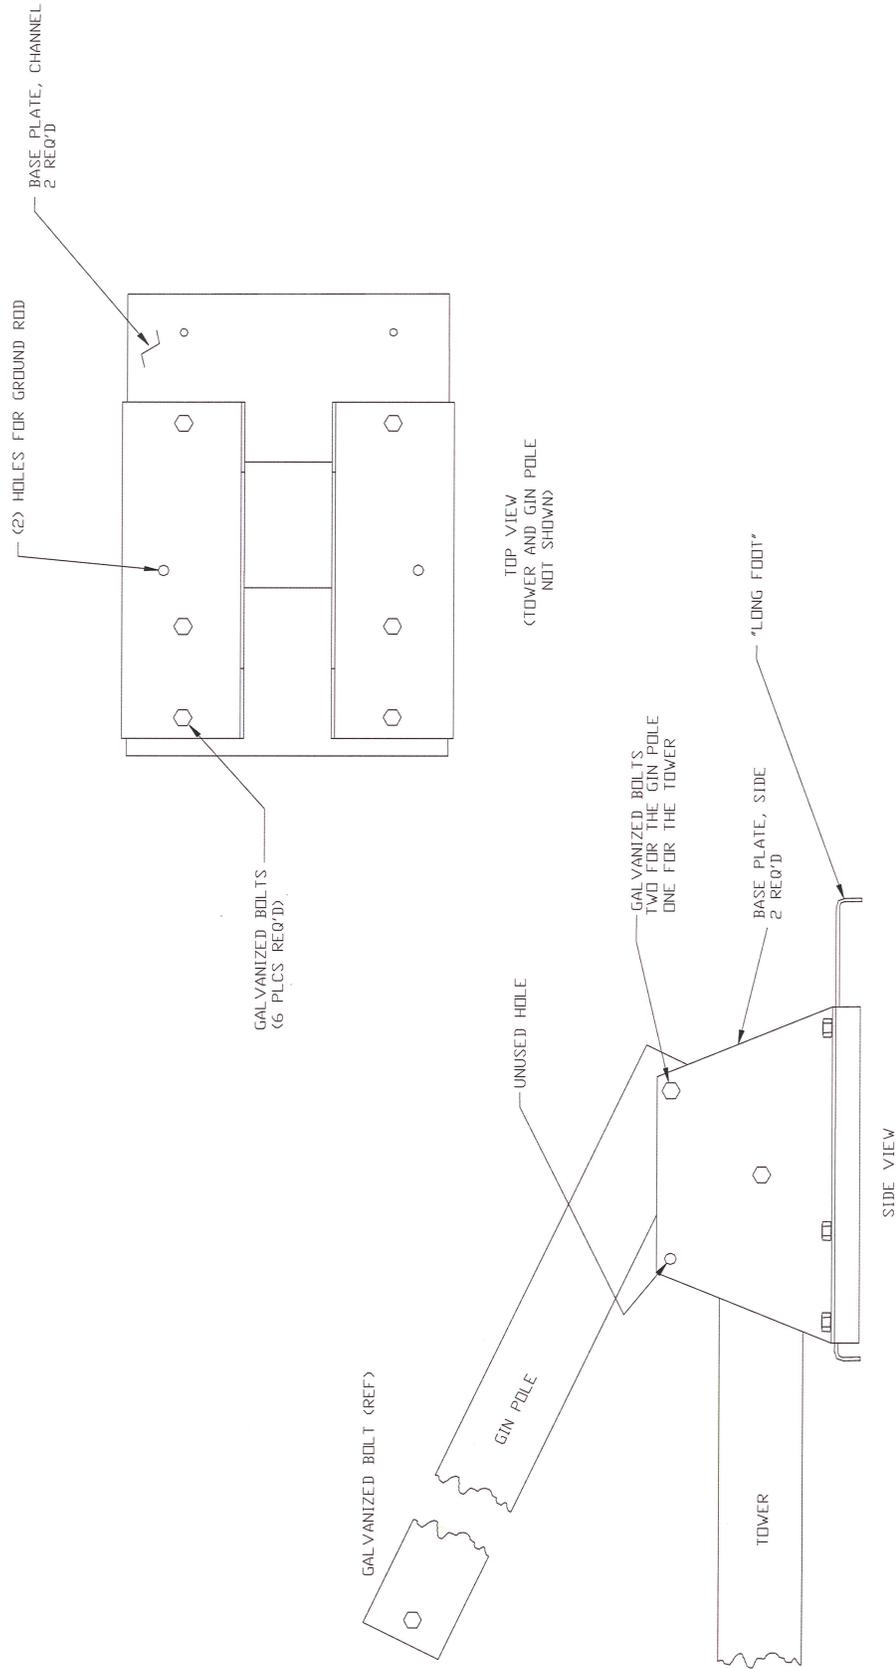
TallTower Base Plate Assembly (for 3.5 inch dia. towers)
